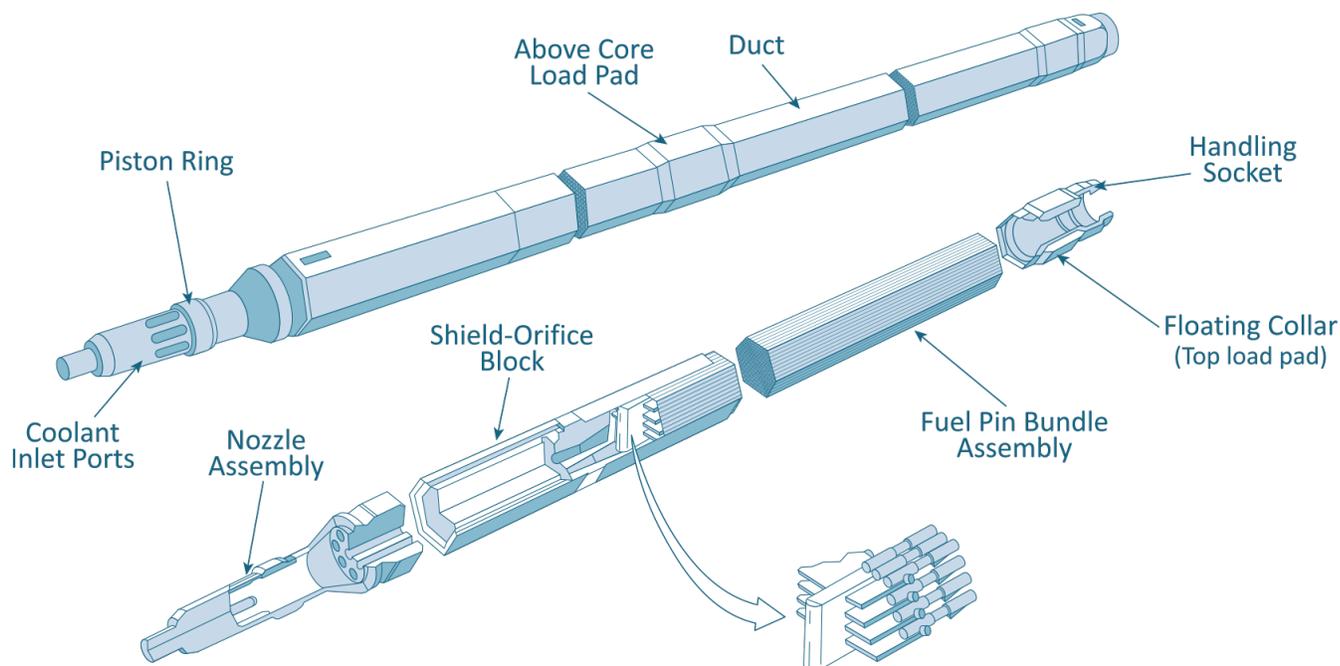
Schematic of typical ARC-100 Fuel Assembly
